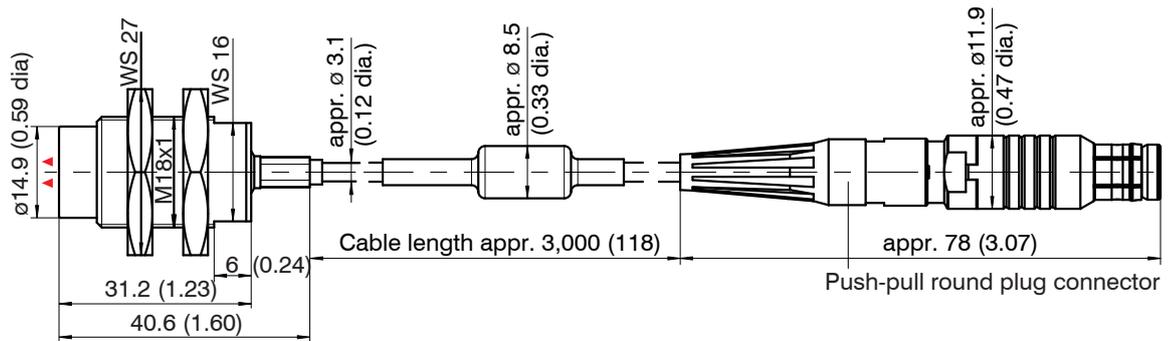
Dimensions EPU6, dimensions in mm (inches), not to scale
